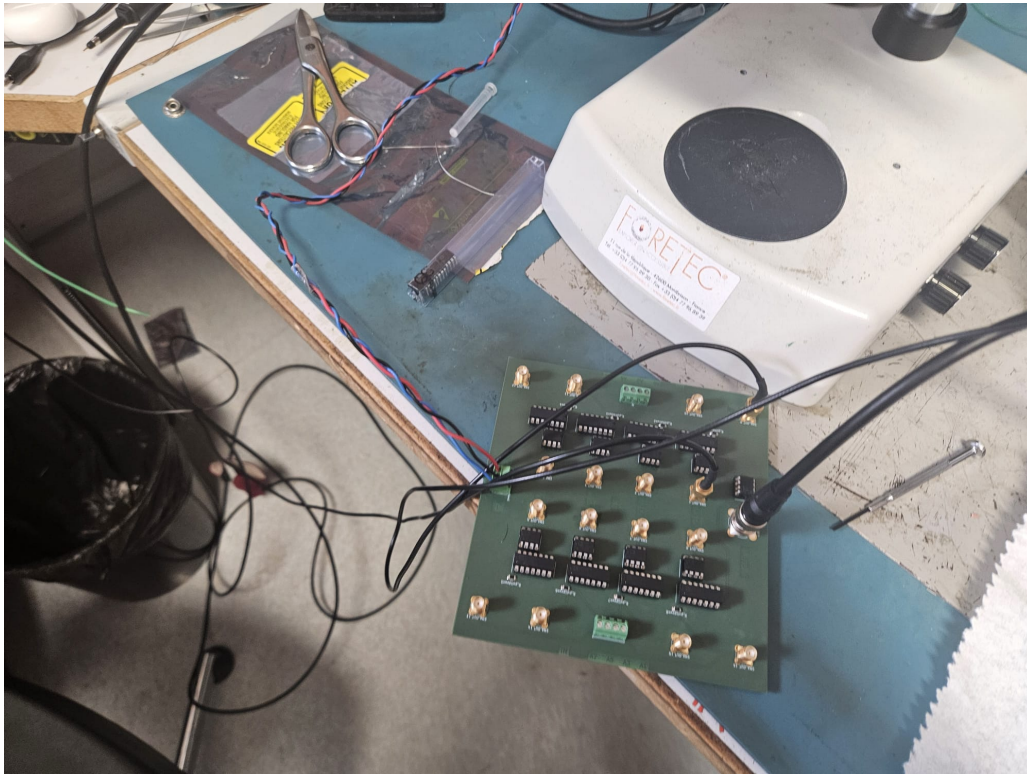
PCB during soldering and visual inspection under the microscope.
